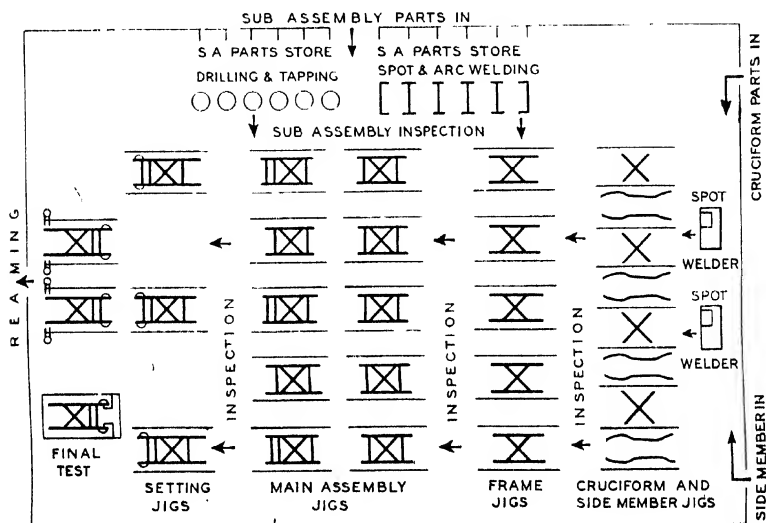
LAYOUT OF THE ASSEMBLY LINES FOR THE "VANGUARD" CHASSIS
